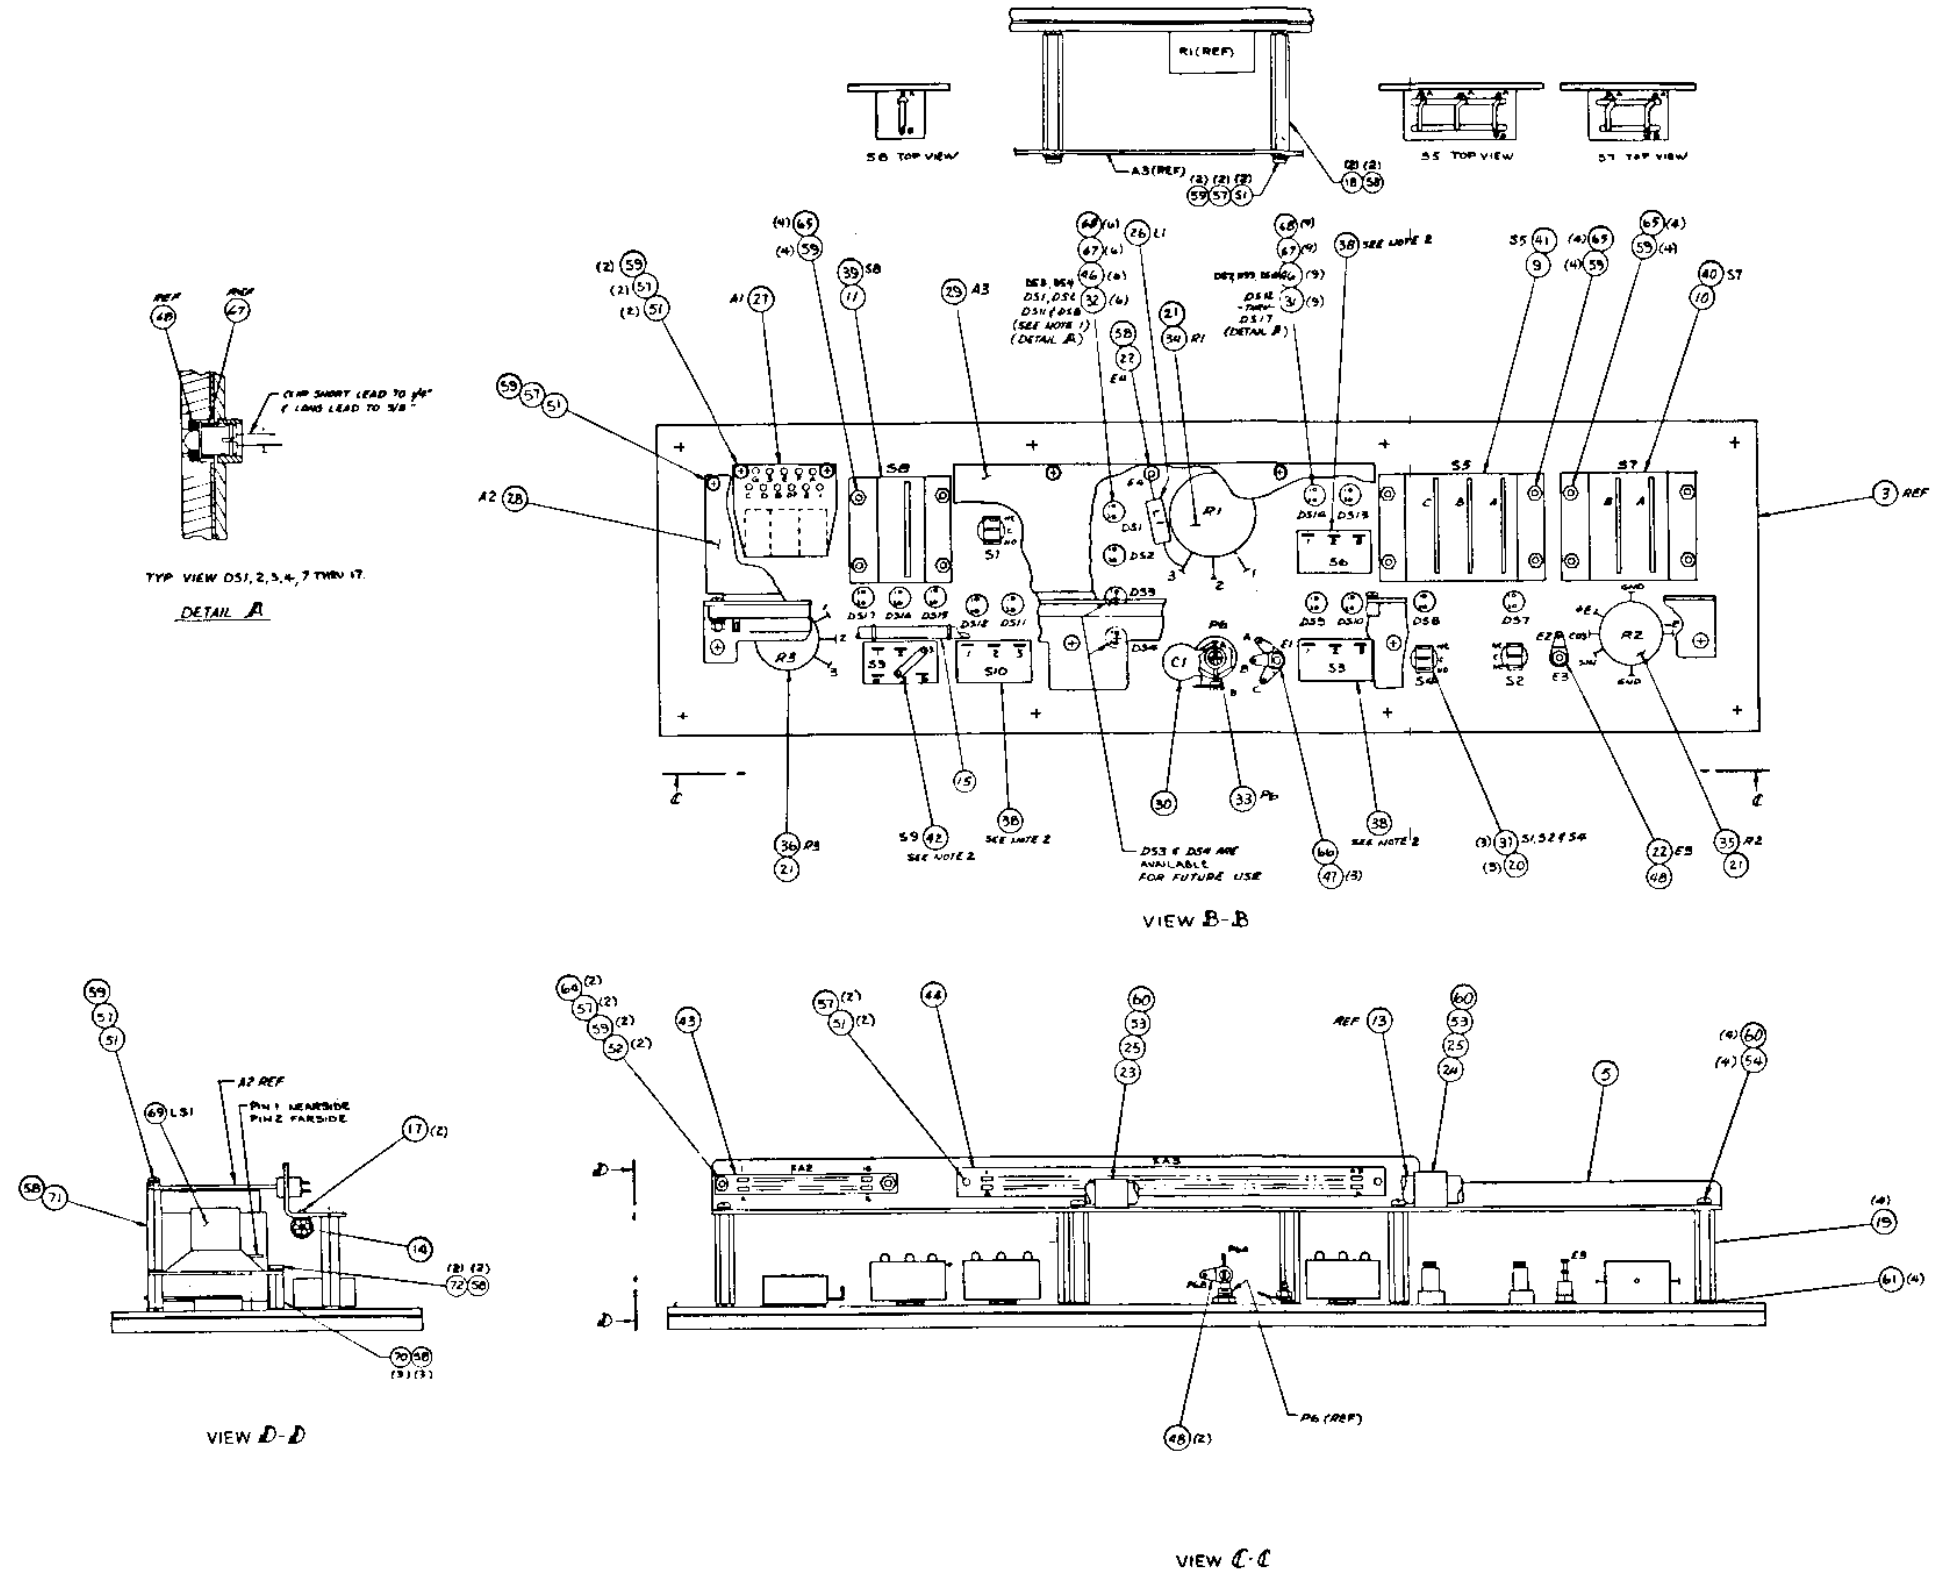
TM/EP Headset Assembly Drawing (Sheet 2 of 2)
